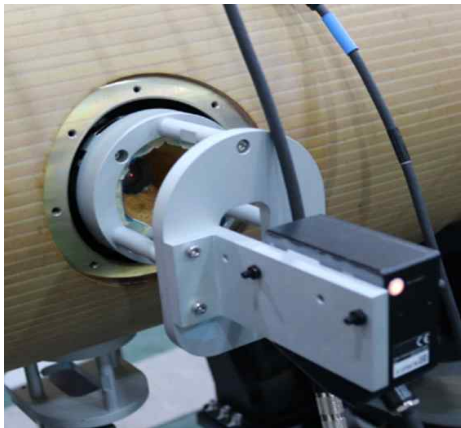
DACS Pintle Position Accuracy Inspection System
